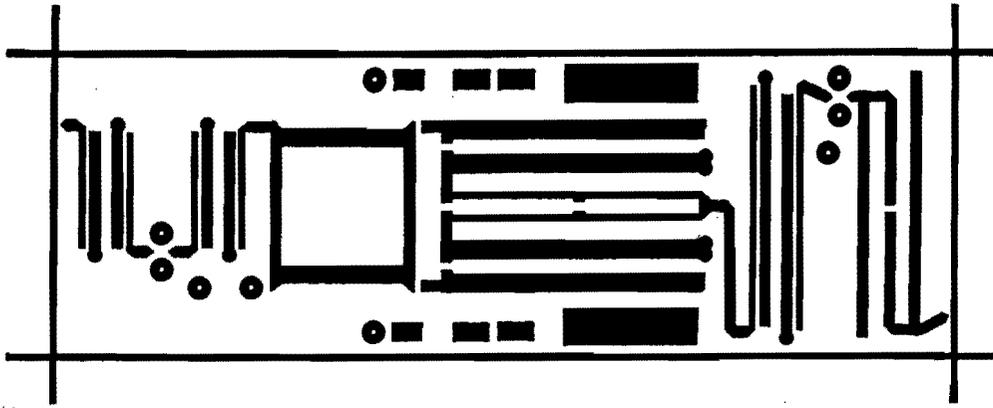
2304MHz RX mixer PCB (0.8mm double-sided FR4).
